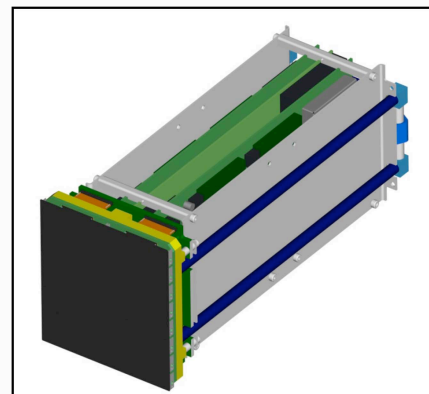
A mechanical drawing of the Super-module. Larger detector system are built using multiple units.
